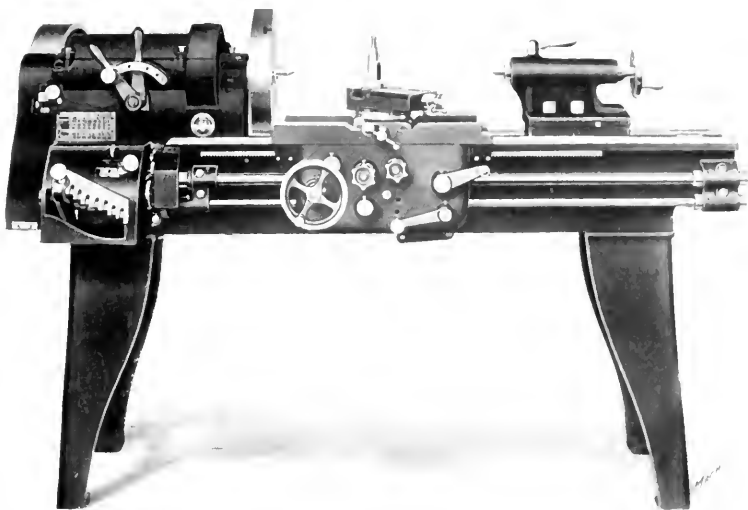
Monarch 14-inch Lathe equipped with Single Pulley Drive
